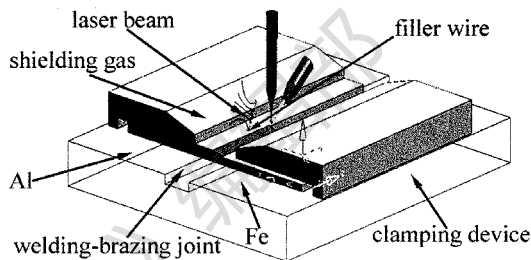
Schematic of the experimental setup for laser welding-brazing steel/aluminum butt joints
